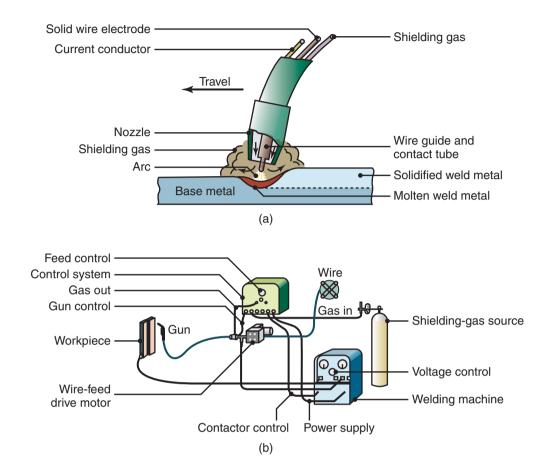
(a) Schematic illustration of the gas metal-arc welding process, formerly known as MIG (for metal inert-gas) welding. (b) Basic equipment used in gas metal-arc welding operations.
